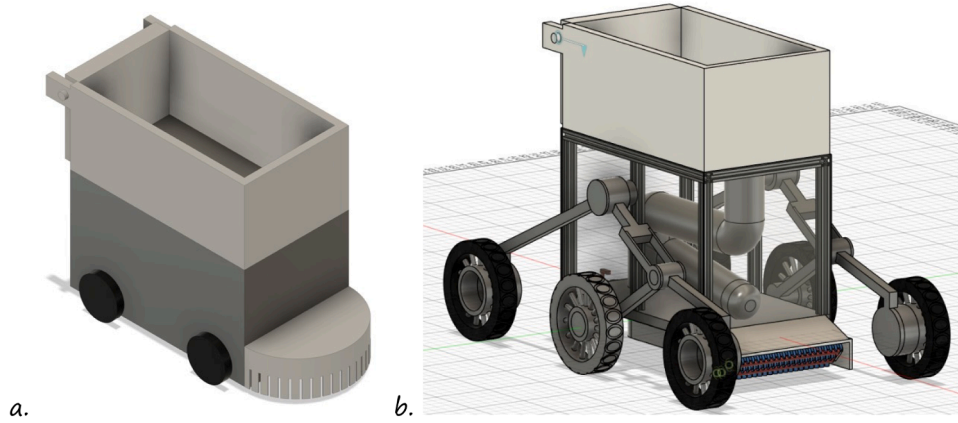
a) CAD render of the original four-wheel steel chassis with perforated front guard, and b) Updated aluminum-T-slot backbone with acrylic panels, showing modular assembly and reduced mass.
